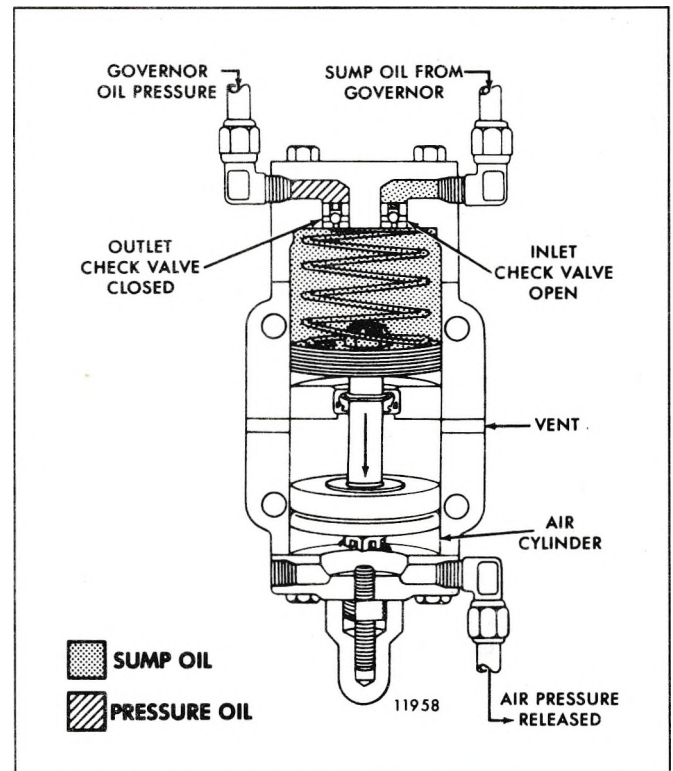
Oil Pressure Outlet Check Valve in Closed Position
